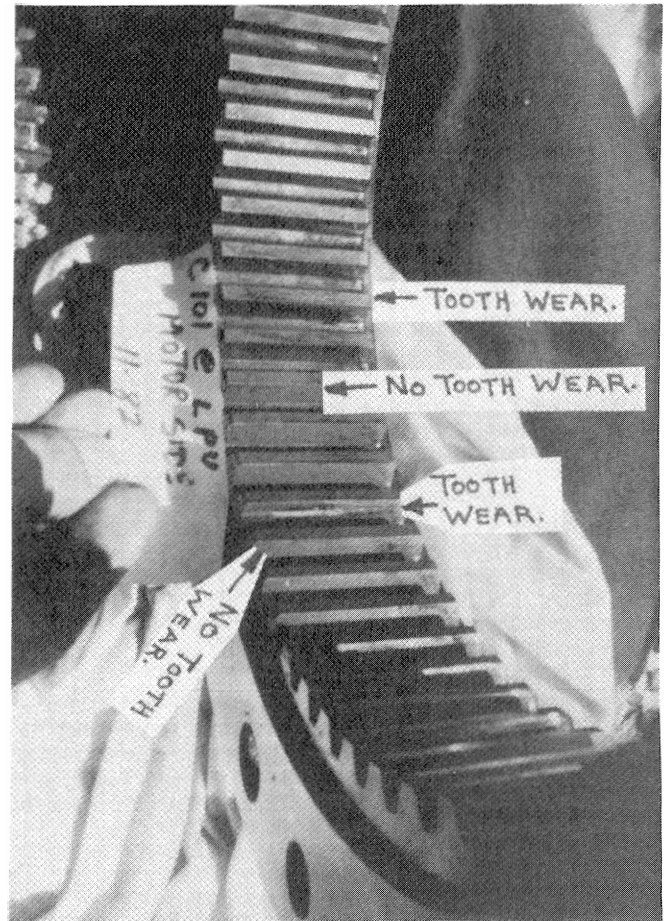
Motor Side Coupling Shroud Gear Teeth Indicated Some Teeth Were Taking Little or No Load.
